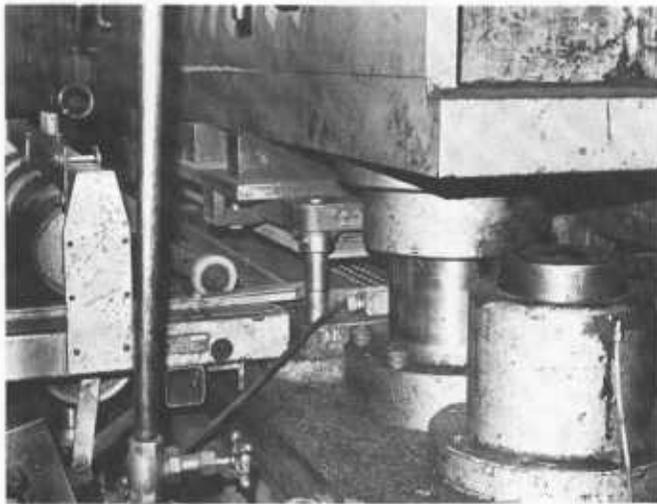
Closeup of punch press showing bed plate and raised head with stripper plate. Advancement of panel and operation of punch proceed automatically.
